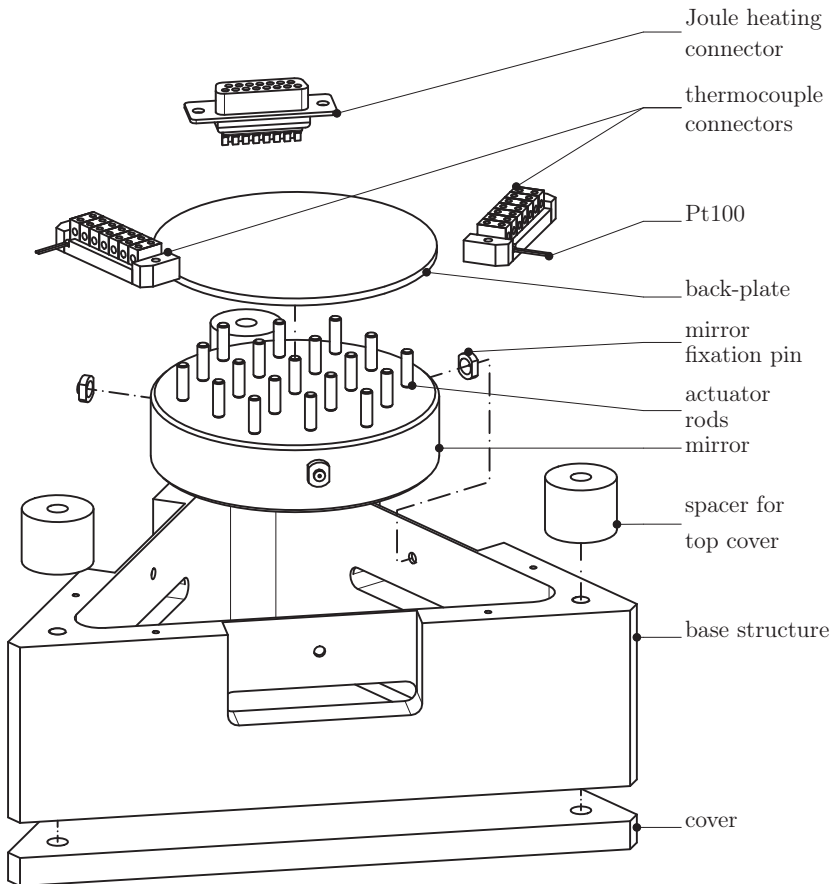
/ Exploded view of the deformable mirror with 7 actuators and 12 passive rods. The base structure is an equilateral triangle with sides of 170 mm and the total height of the assembly, including covers is 80 mm (drawing scale 1:2).
